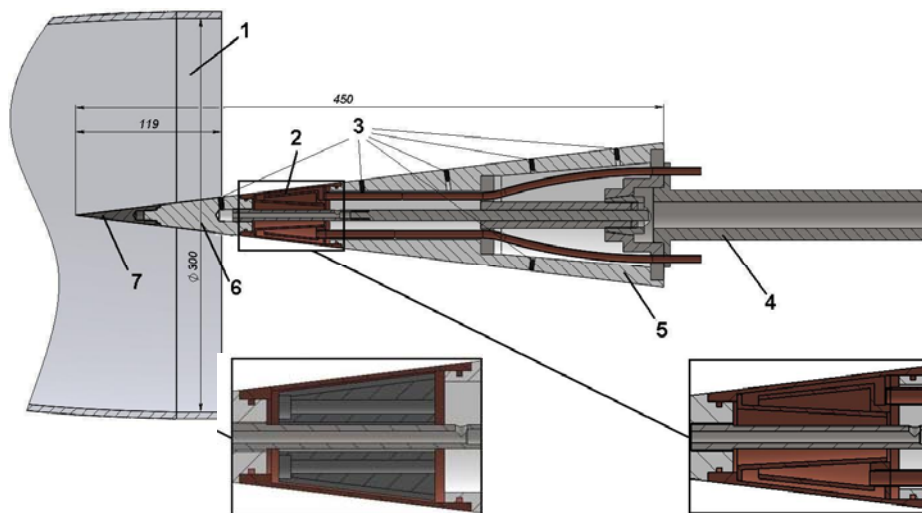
Draft of the model with heater/cooler sections (1-wind tunnel nozzle; 2 - heater/cooler section; 3- PCB sensor; 4- model support; 5- flare section; 6- middle section; nose section).
